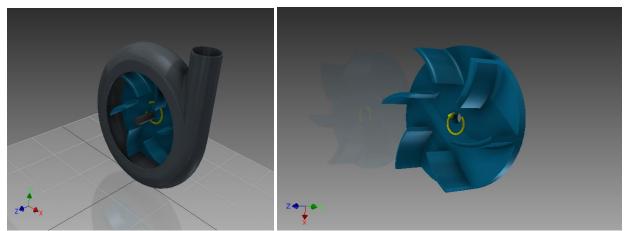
Photograph of the complete assembly and open centrifugal pump impeller
